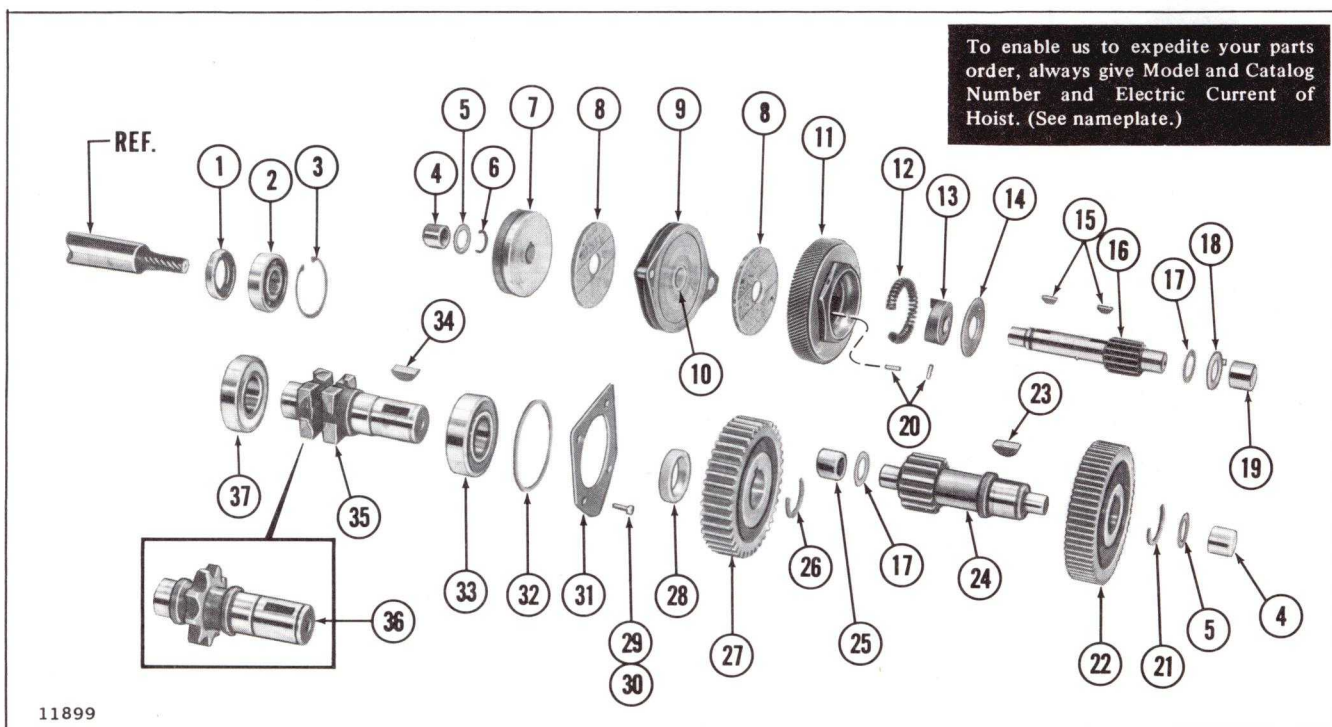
GEARING AND LOAD BRAKE PARTS – (1, 2 & 3 Ton Capacity Hoists)
